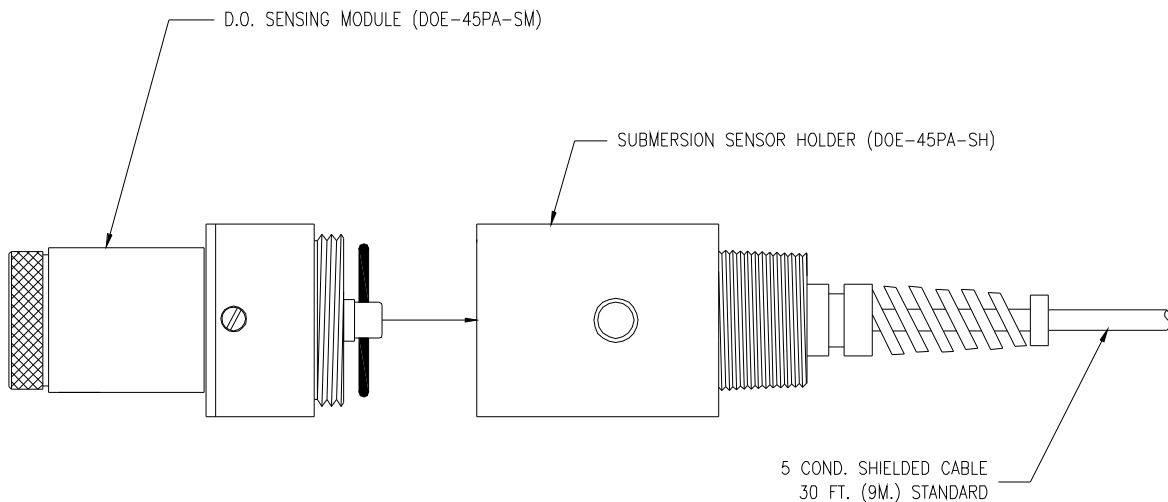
SUBMERSIBLE D.O. SENSOR ASSEMBLY
